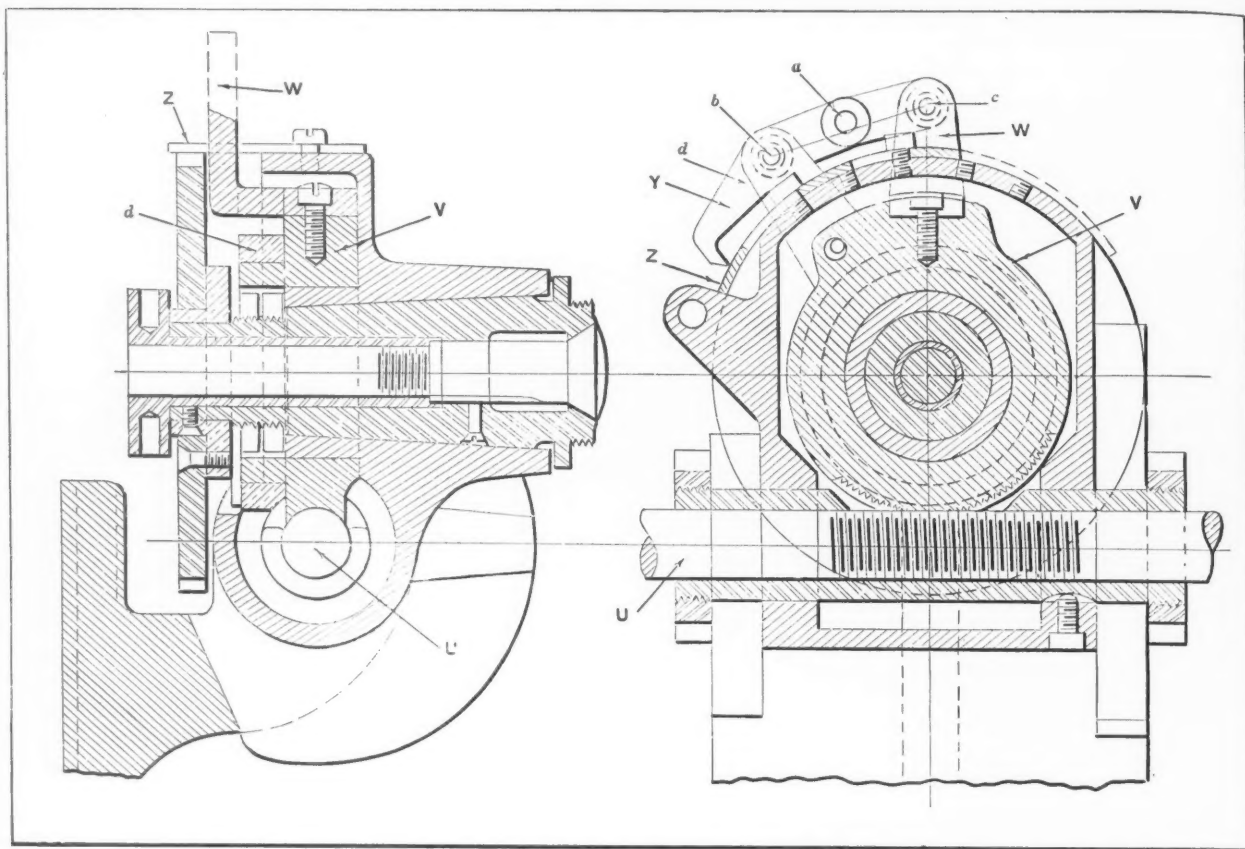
Cross-sectional Views of the Dividing Head Unit
